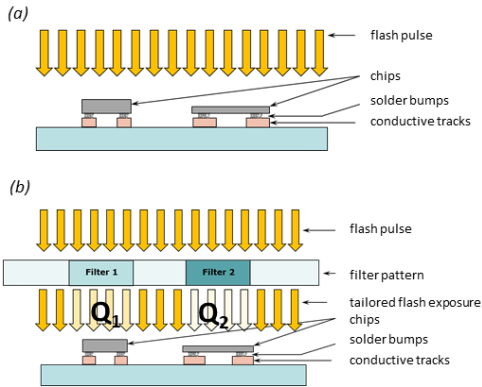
Photonic soldering process. (a) Uniform and (b) tailored for the component's heat capacity through a filter pattern flash pulse directed to the chip placed on printed solder paste.
